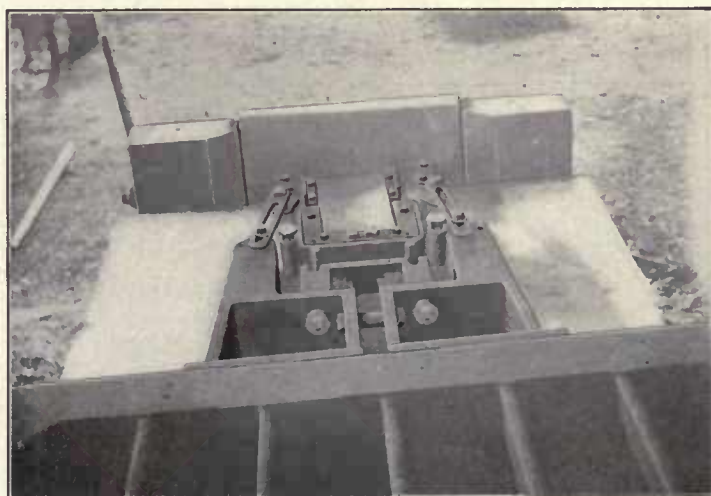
Dies Opening Up After the Step Has Been Formed.
